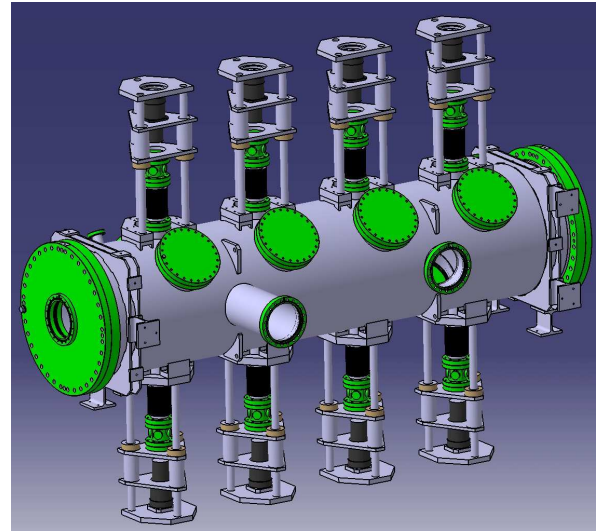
Design drawing of the prototype tank of the stochastic cooling system for the CR. The electrodes can be moved by linear motor drives. Electrodes and amplifiers inside the tank can be cooled by cold heads.
